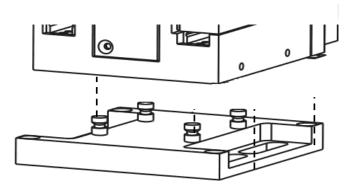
Mounting the TRIO MP-245/M on the Adapter Plate
